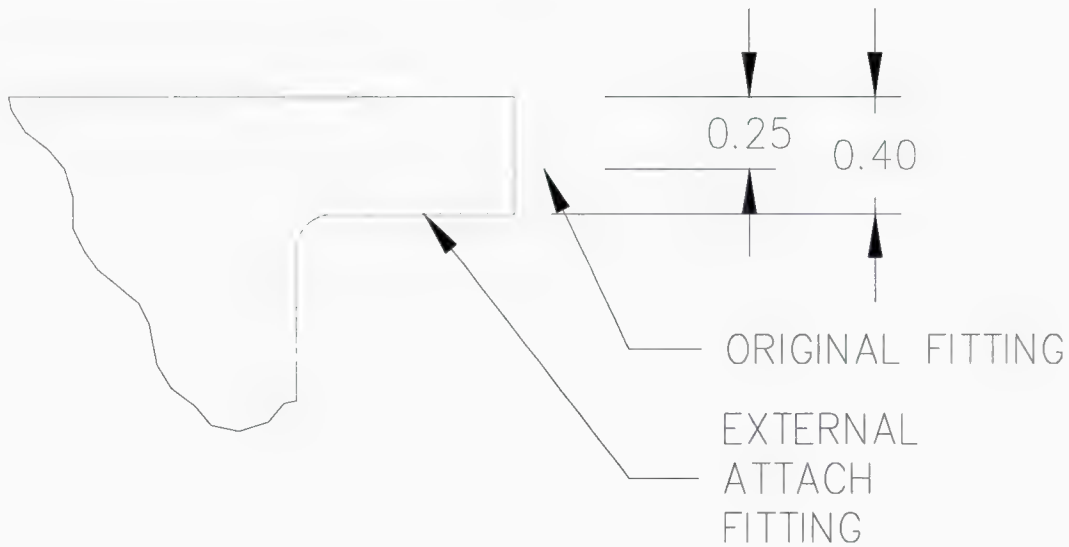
Changed Geometry of Forward Fitting Flanges (Aft Ftg Similar)
